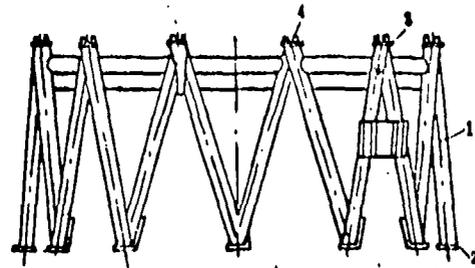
Frame-type transitional section: 1 - Tube; 2 - Bottom plate; 3 - Cushioning seat; 4 - Positioning pin.
